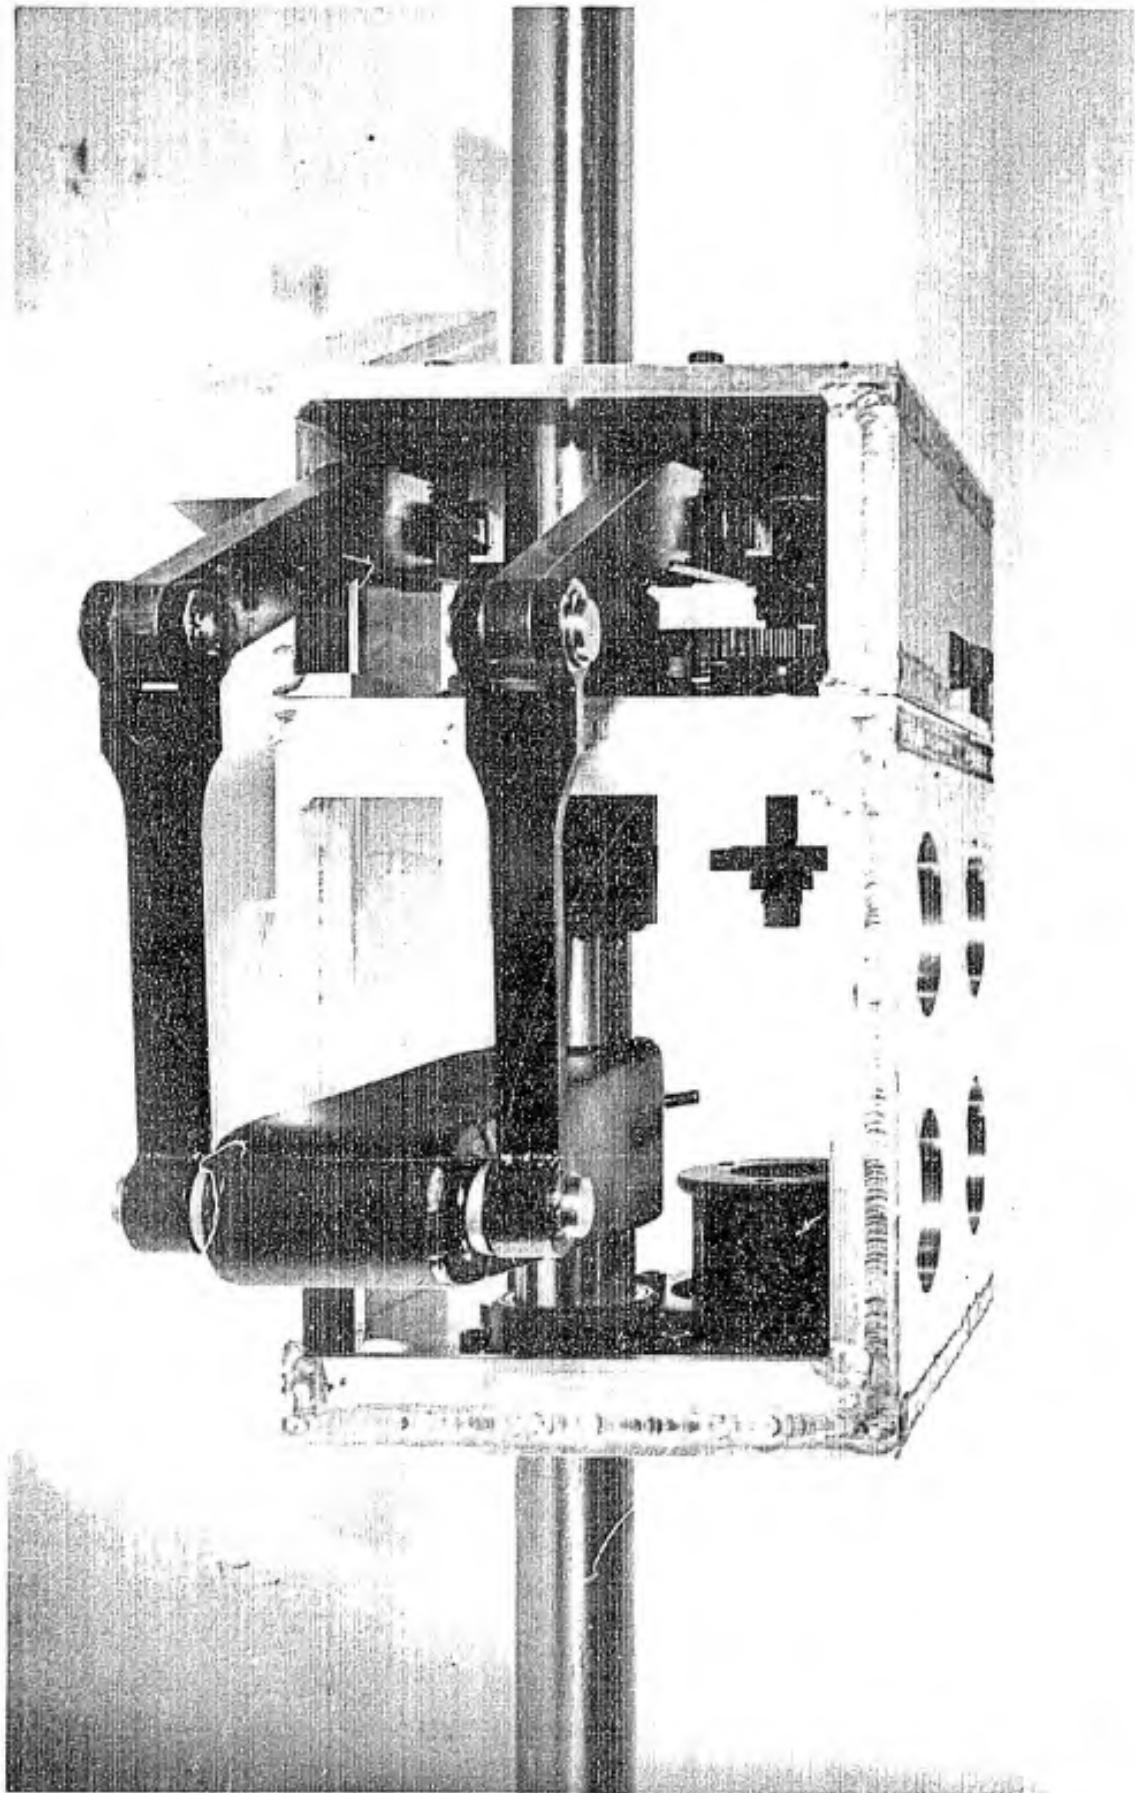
BIAxIAL LOADING FIXTURE (REAR VIEW)
